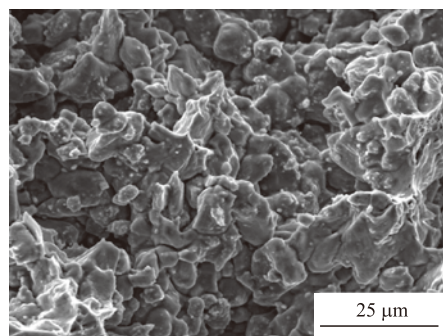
Fracture appearance of weld/T91 interface after accelerated operation for 5 012 h
